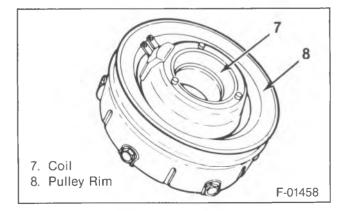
Clutch Coil, Pulley Rim, Rotor and Bearing Assembly
